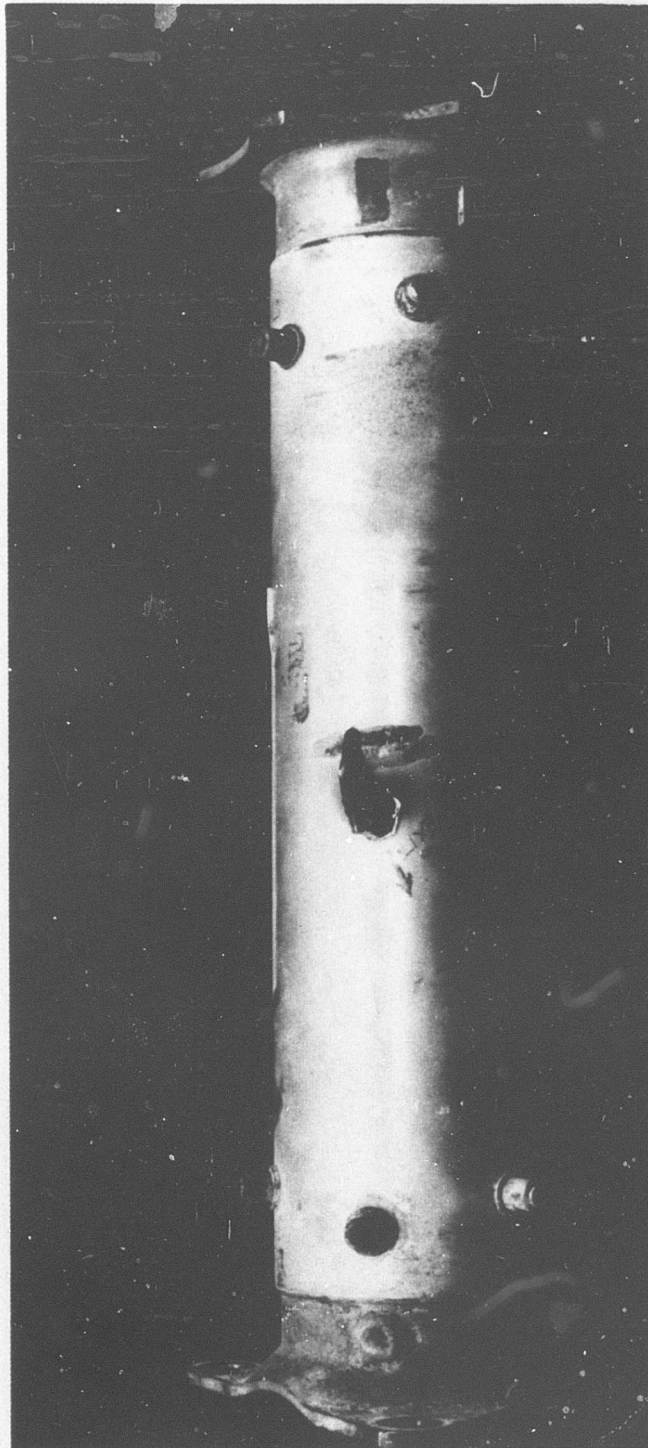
Aluminum Specimen 8, Exit Hole Damage.
